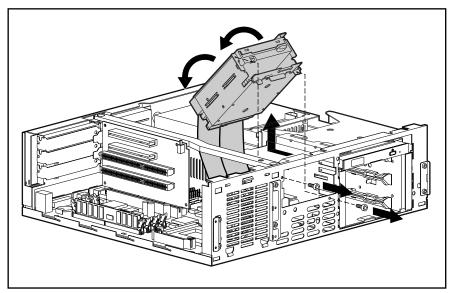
Moving the Diskette Drive Cage on a ProLiant 850R 6/200N
